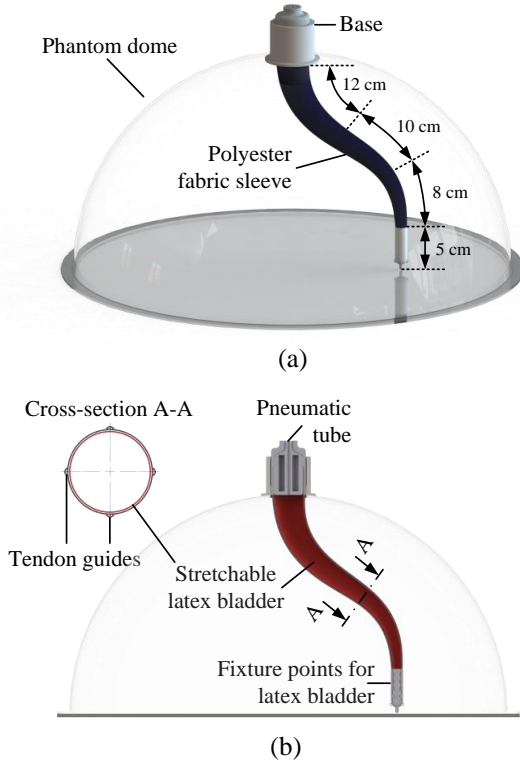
CAD drawings of the soft manipulator: (a) 3D and (b) section view.
